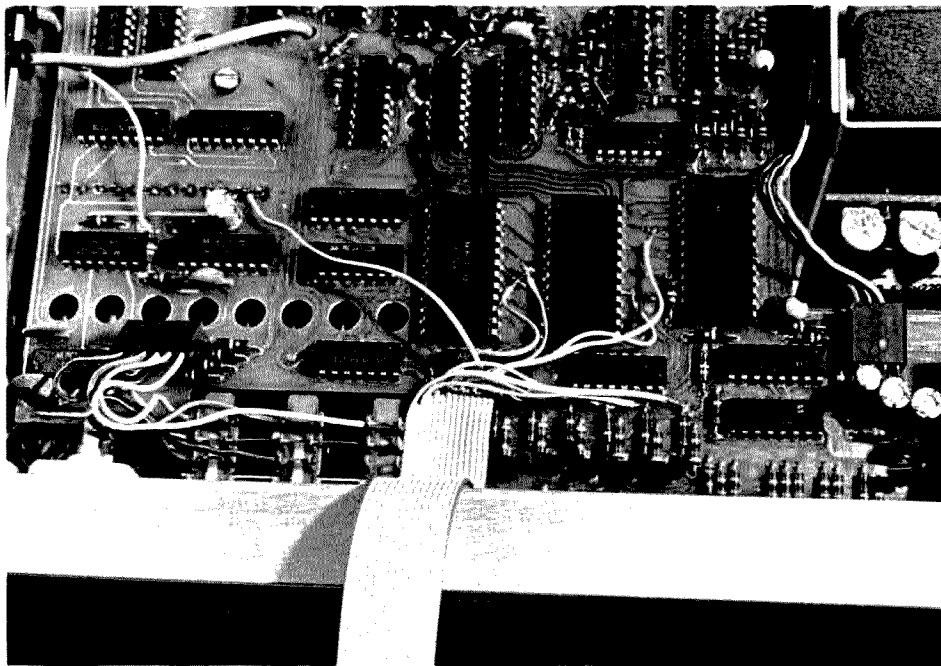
Photo F. Details of the hard-wiring technique used on the DR-7 board can be seen here.
